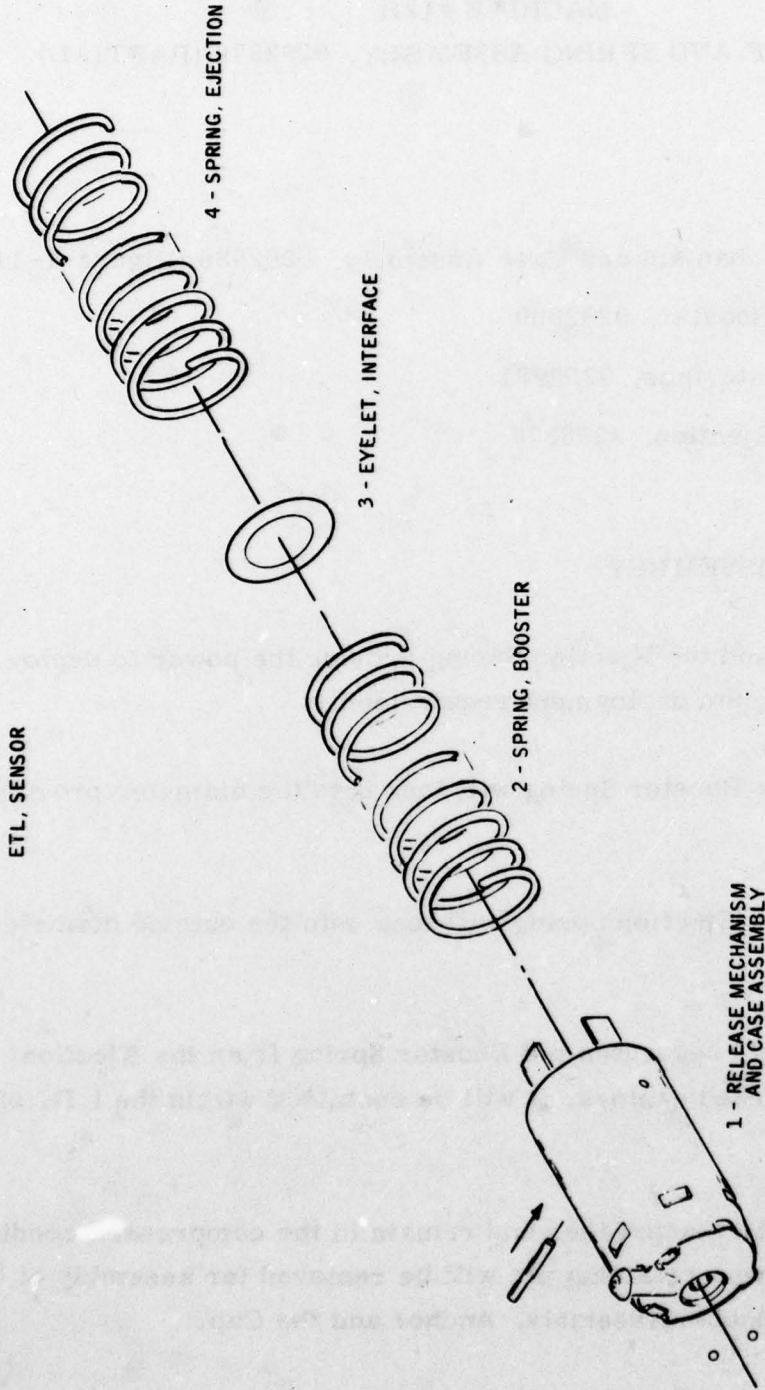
Machine #12B - Sensor Case and Spring Assembly
